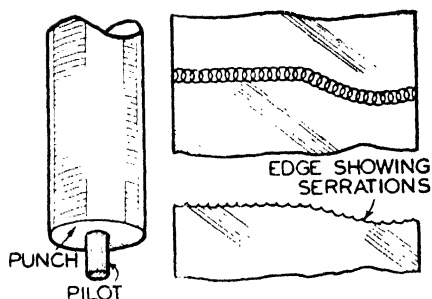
HEAVY-DUTY NIBBLER FOR CUTTING PLATES UP TO $\frac{3}{16}$ IN. IN THICKNESS
